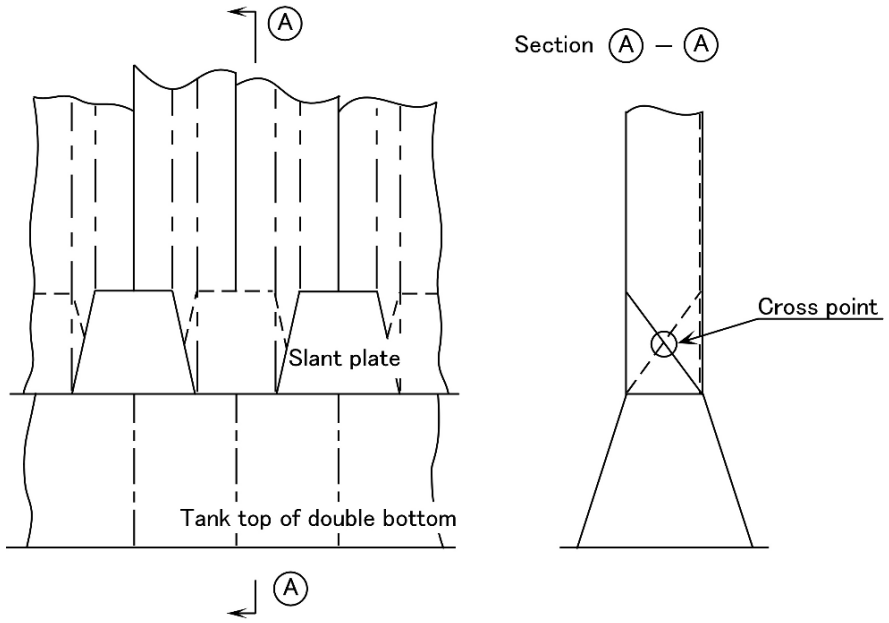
Slant plate of lower corrugated bulkhead
